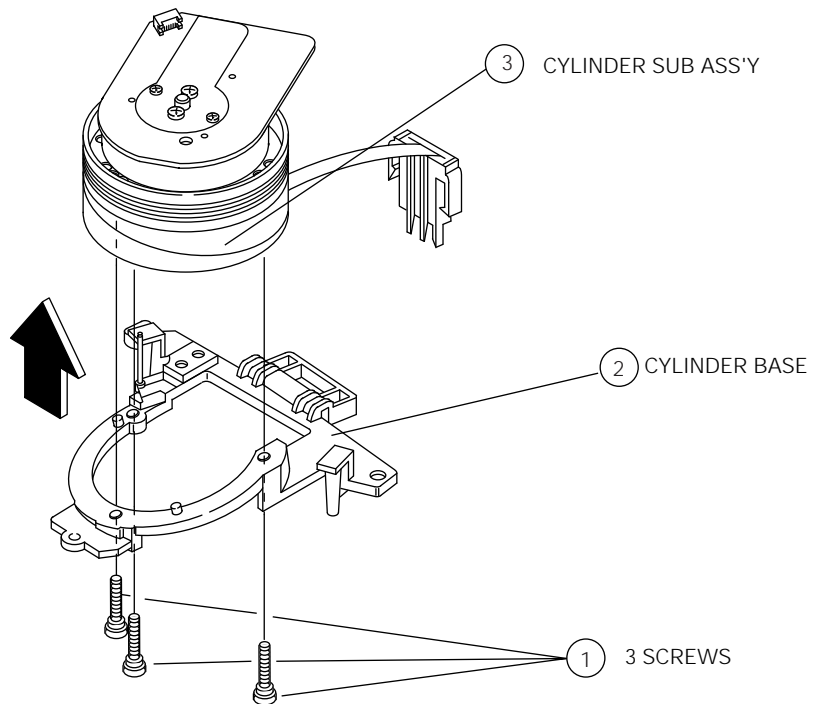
Cylinder Ass'y Removal from Cylinder Base
